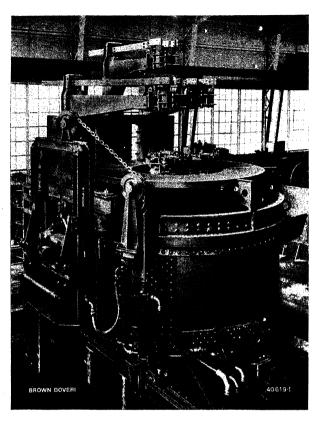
Electric arc furnace with a hearth body which can be run in and out so that it can be grab-charged. View taken during erection.
